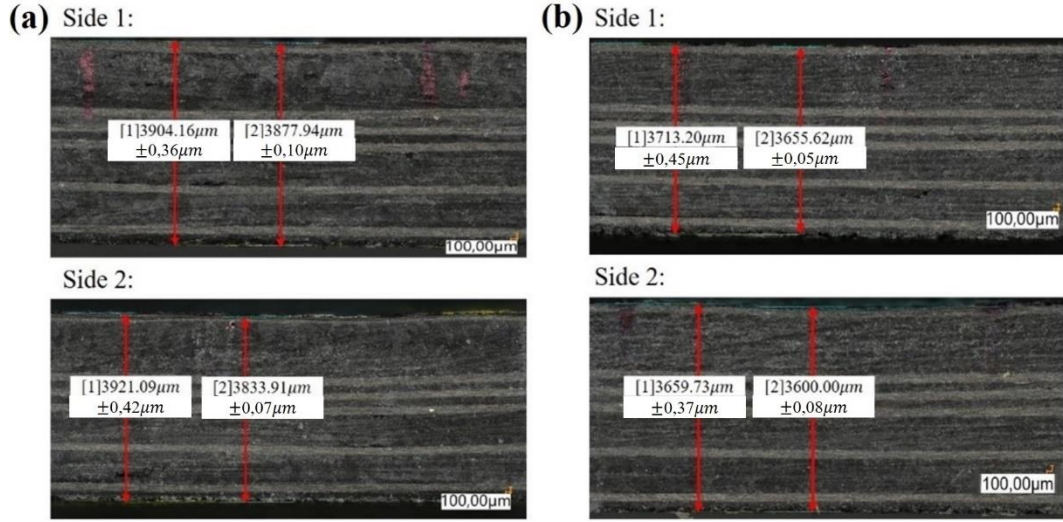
Cut-sectional photographs of preliminary impact test specimens:
